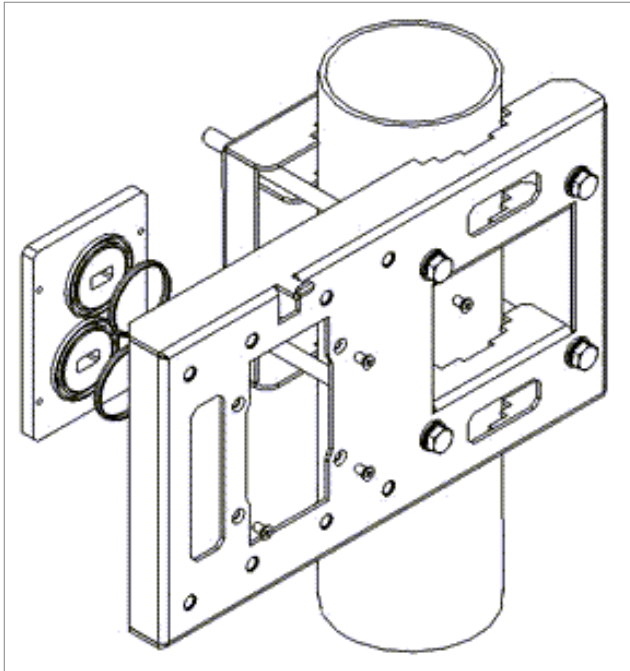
Remote Pole Mount Kit – 4-5 GHz
